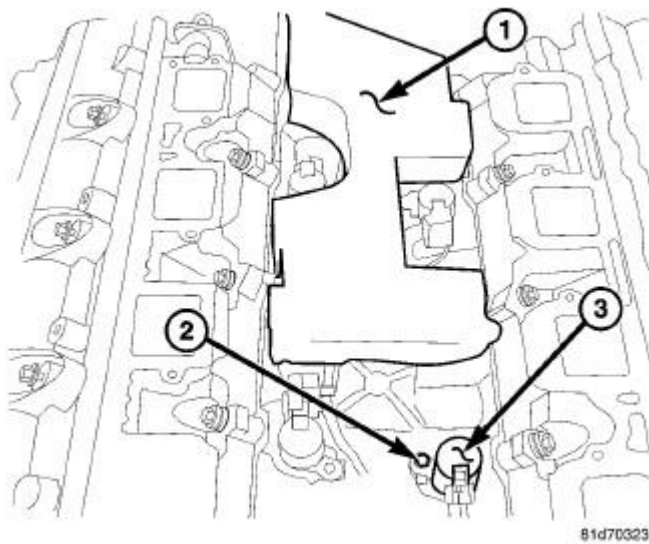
Intake Manifold Foam Insulator Pad, MDS Solenoids & Bolts
